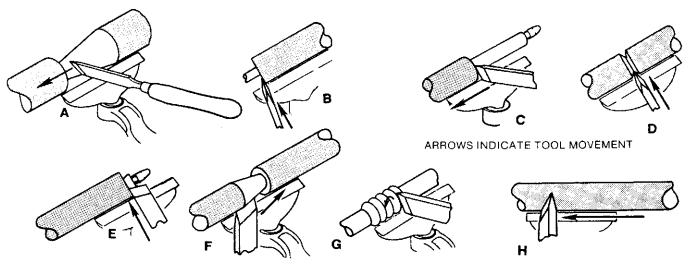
Here are some of the ways a skew can be used: (A) to form and smooth a taper, (B) to trim ends, (C) to square a shoulder, (D) to make V-cuts (also with heel of skew), (E) to square ends of stock, (F) to smooth a taper, (G) to form beads, and (H) to smooth a tapered cylinder.
